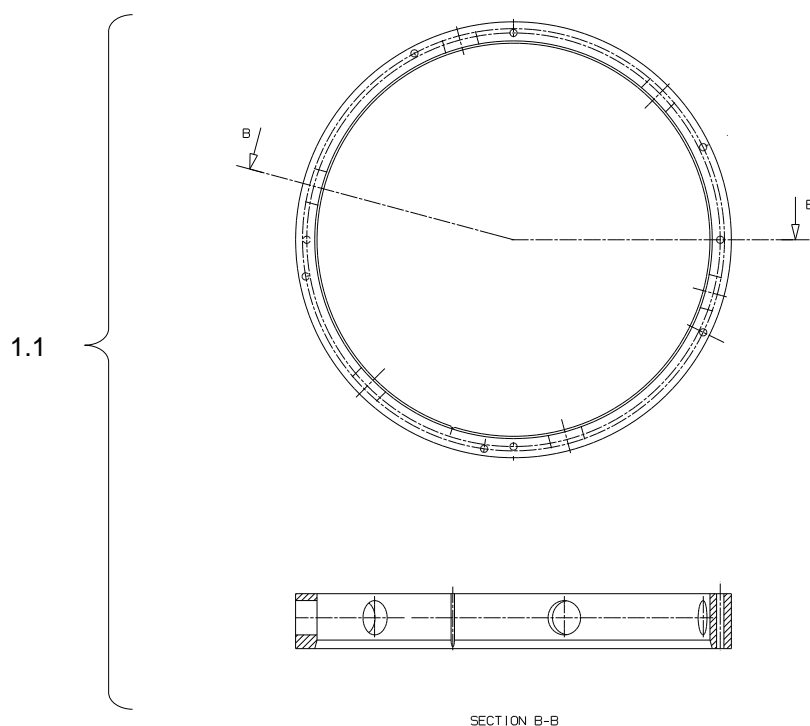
Guide, Swashplate Duplex Bearing Instl
